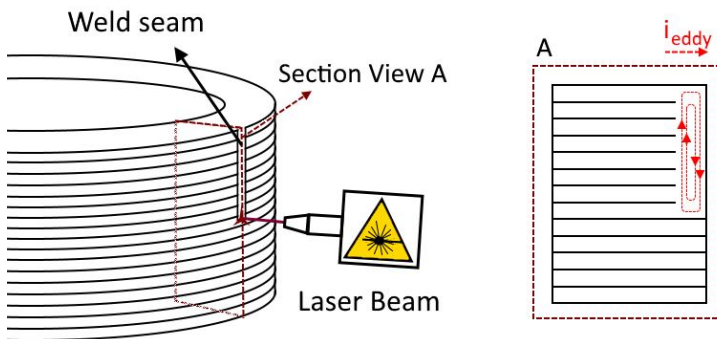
Illustration laminations formed into a rigid stack during laser welding. A section view shows the eddy current path in the weld seam when the stack is magnetized.
